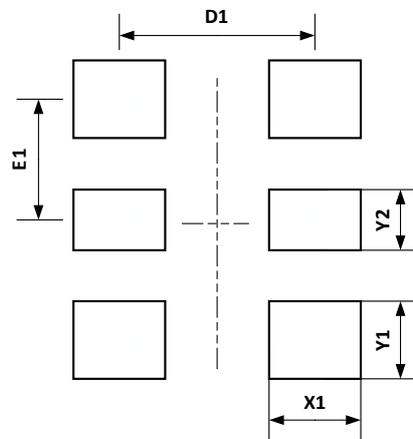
AS5002 (5032 and 3225 package) PCB Land Pattern
